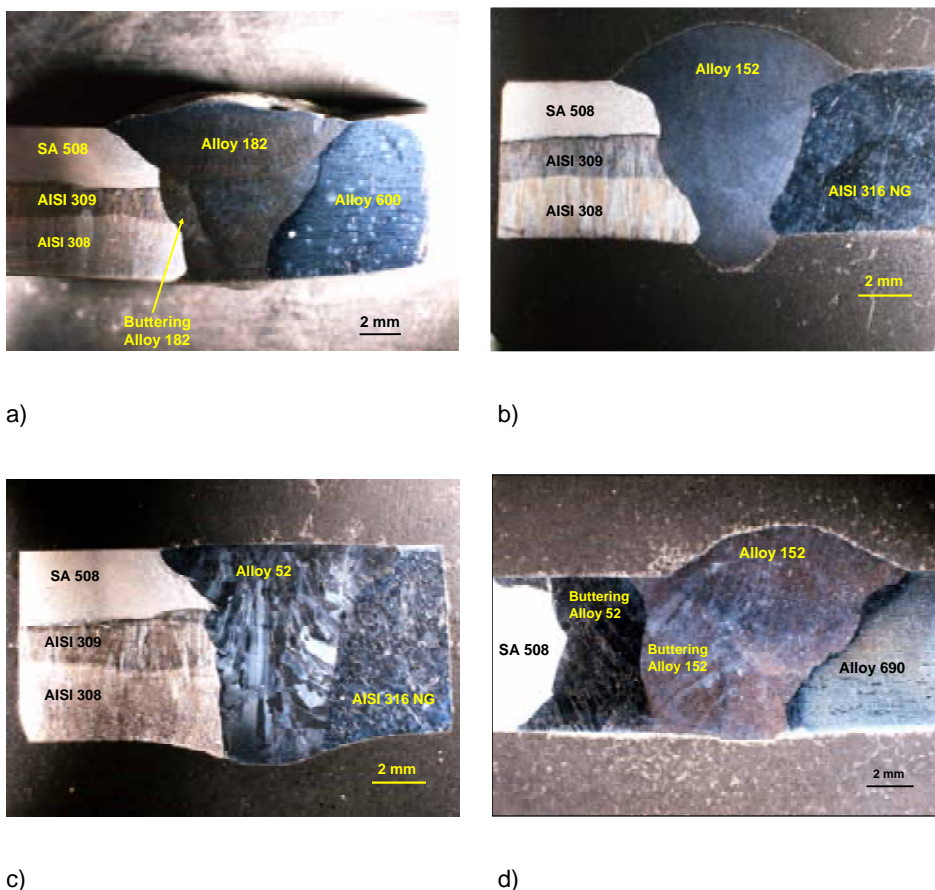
Groove geometry, materials and cross-section of a) mock-up TV1, b) mock-up TU1, c) mock-up TU2 and d) mock-up TU3 dissimilar metal welds.
